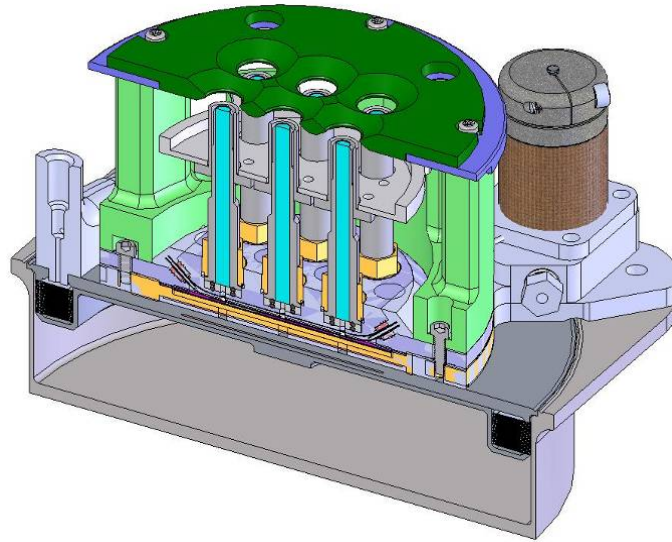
CAD drawing of the colloid thruster, taken from Demmons [4]
